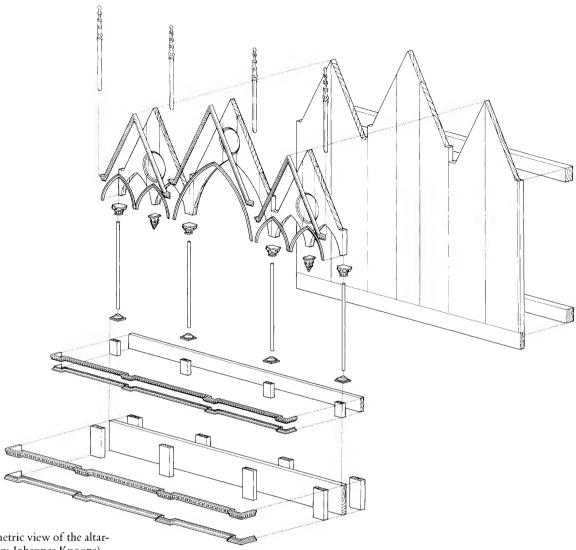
Exploded isometric view of the altarpiece in fig. 8 (drawing: Johannes Knoops)
